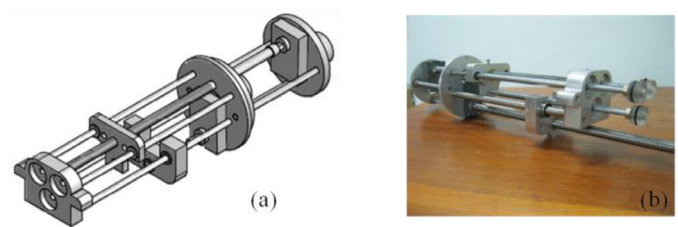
(a) CAD model of mechanism assembly (b) fabricated model of mechanism assembly.
